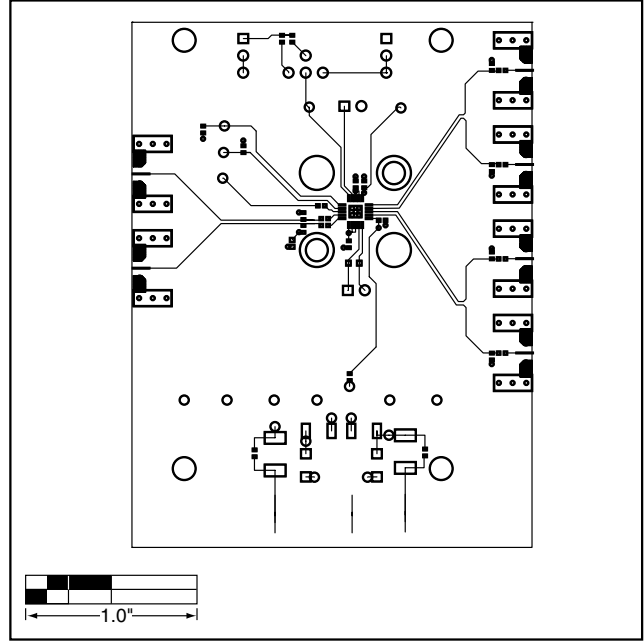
MAX3964ETP EV Kit PC Board Layout—Component Side
